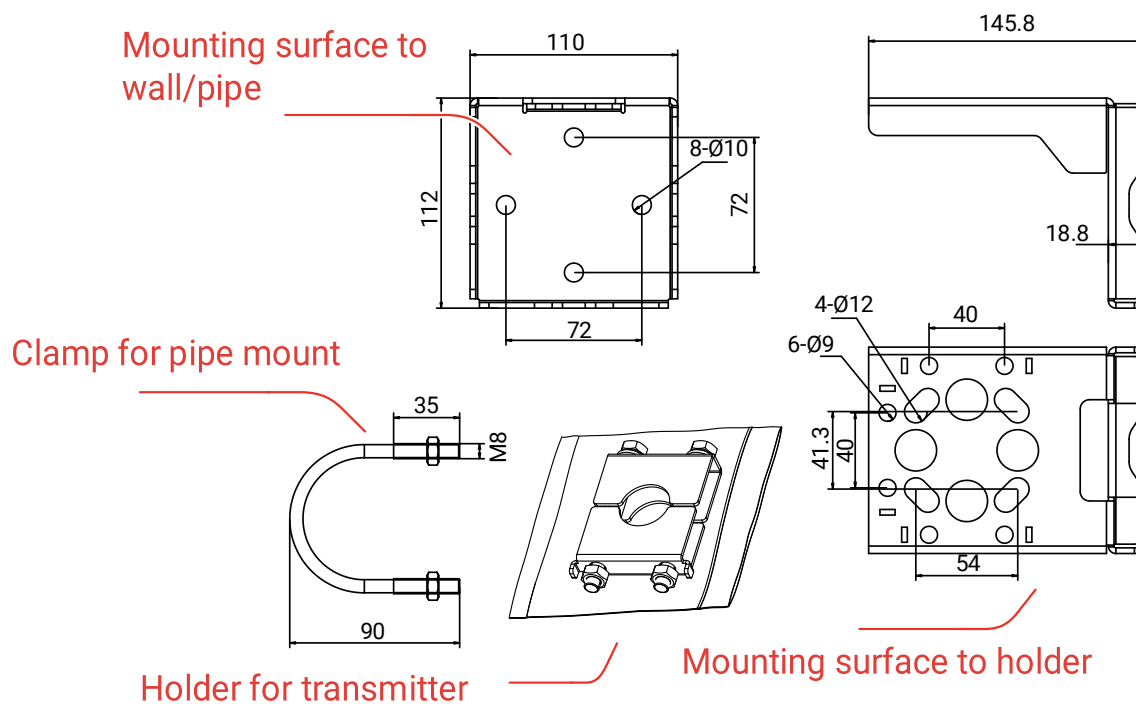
Bracket parts and size for gauge and absolute transmitter (unit: mm)
